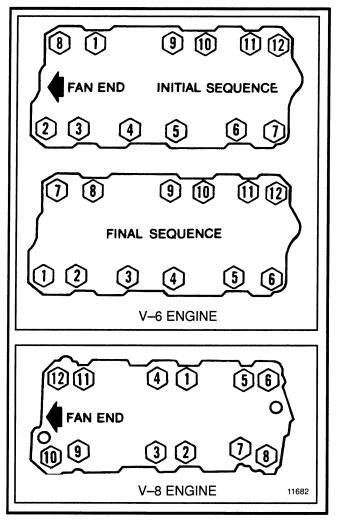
TIGHTENING SEQUENCE, INLET MANIFOLD
